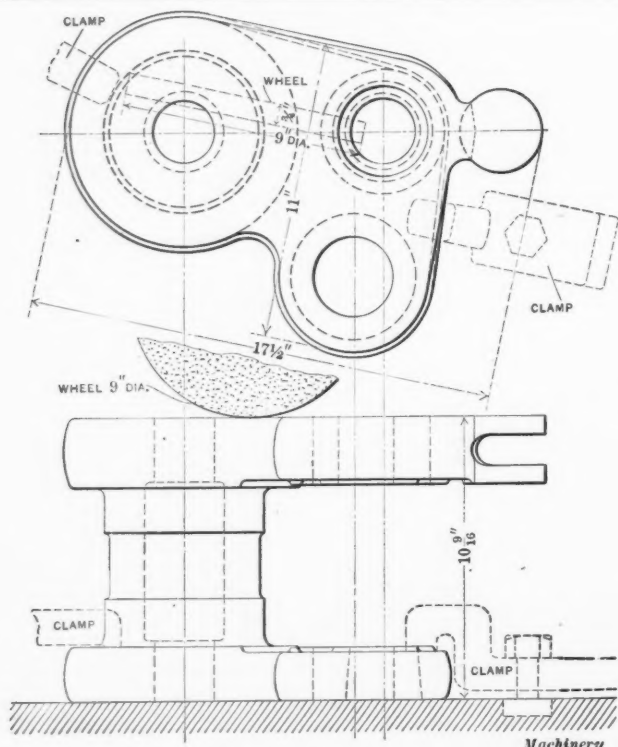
Method of grinding a Wrist for a Plain Milling Machine
